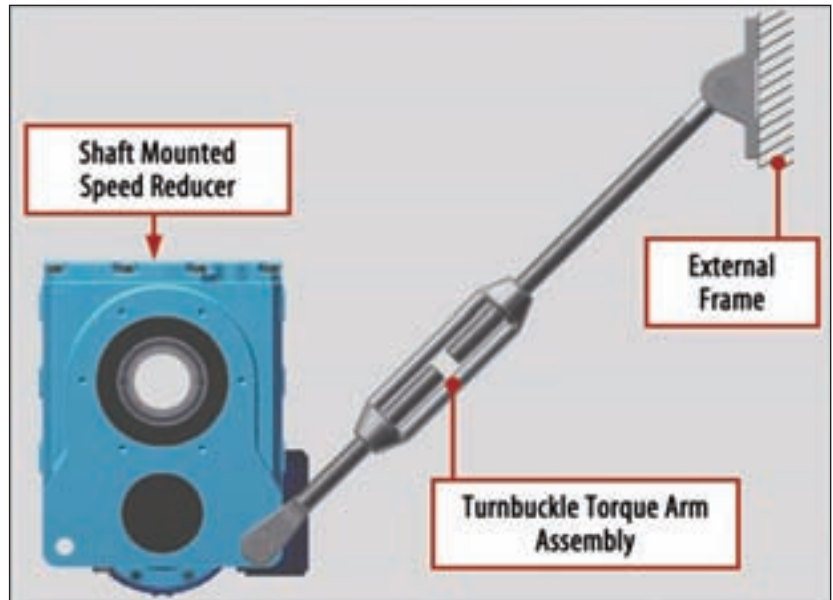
A typical mounting style for a turnbuckle-style torque arm.
